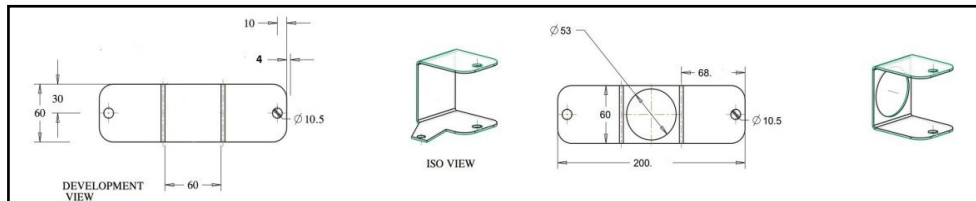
Design of Frame-U-Clamp and Wheel U-Clamp
